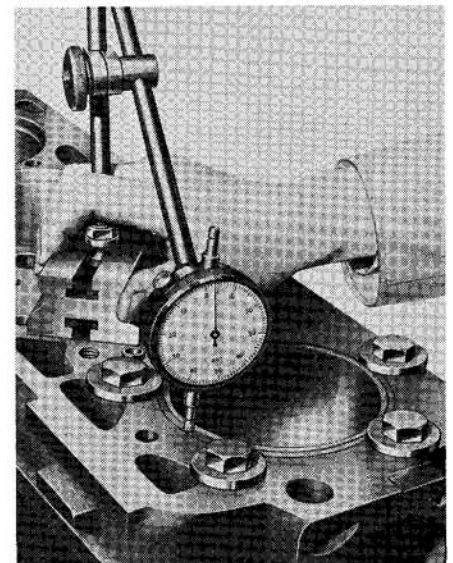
Checking cylinder sleeve protrusion with dial indicator. A straight edge and feeler gage can also be used for this purpose. Note the four cap screws and washers used to clamp sleeves into position while checking protrusion. Refer to text.
